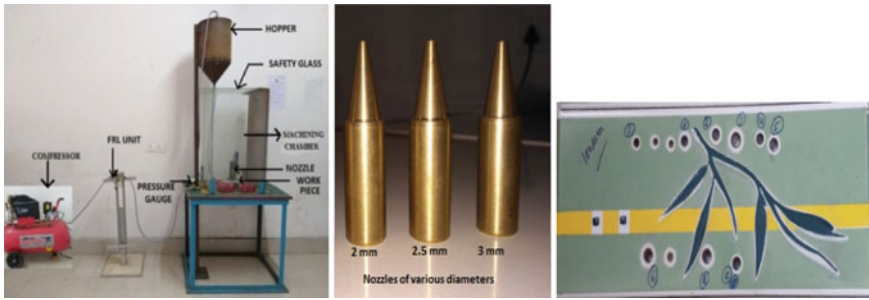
Abrasive jet machining setup for making holes on ceramic tile at different nozzle diameters, SODs and pressures
